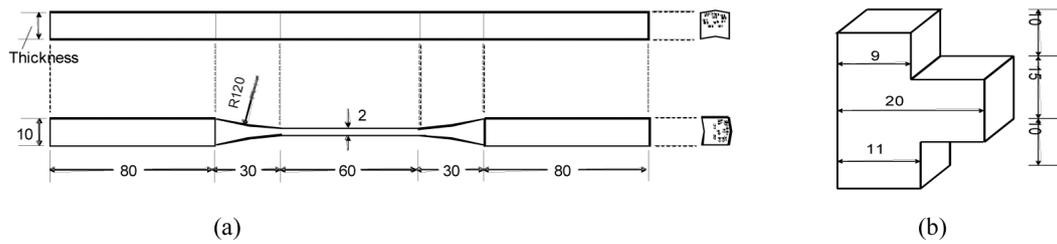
Dimensions of (a) tensile and (b) shear test samples (parameters are in mm)
